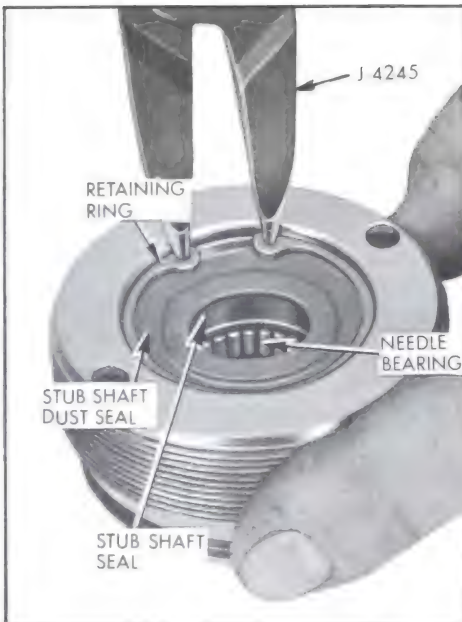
Removing Stub Shaft Seal Retaining Ring
